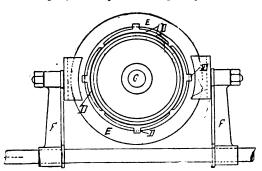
FIG. I.—END VIEW OF GREFFE FRICTION CLUTCH.
